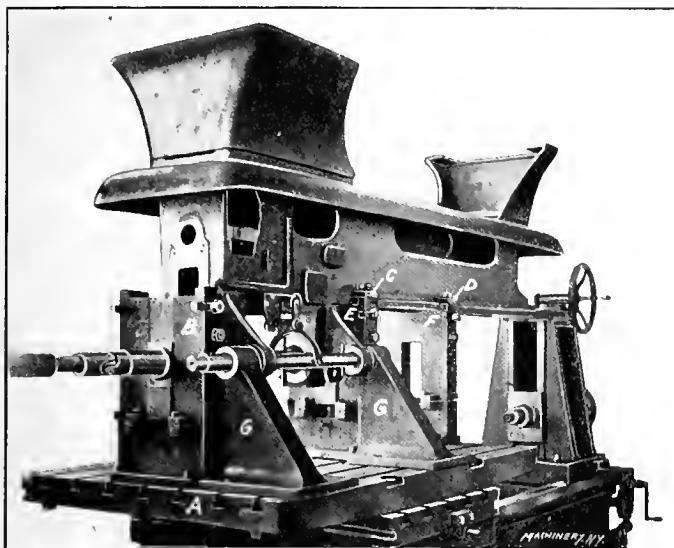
Fixture for Boring Large Size Turret Lathes.
